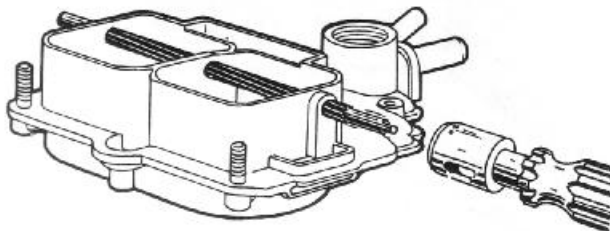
Reaming the choke shaft bore (Sec 7)
